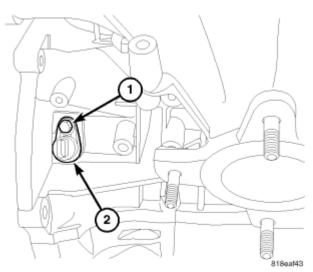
CRANKSHAFT POSITION SENSOR Courtesy of CHRYSLER LLC
